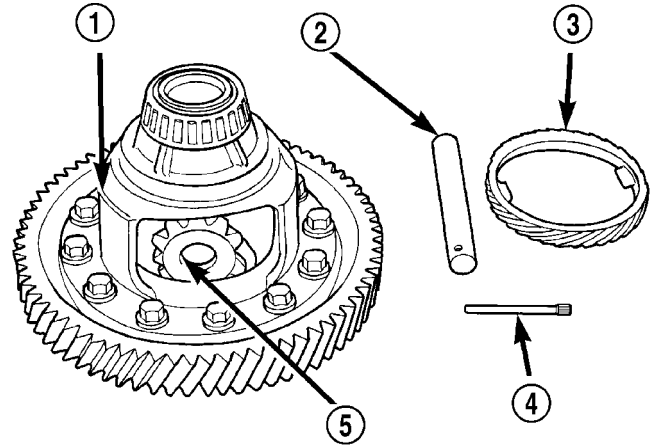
Remove Pinion Gears, Side Gears, and Thrust Washers
